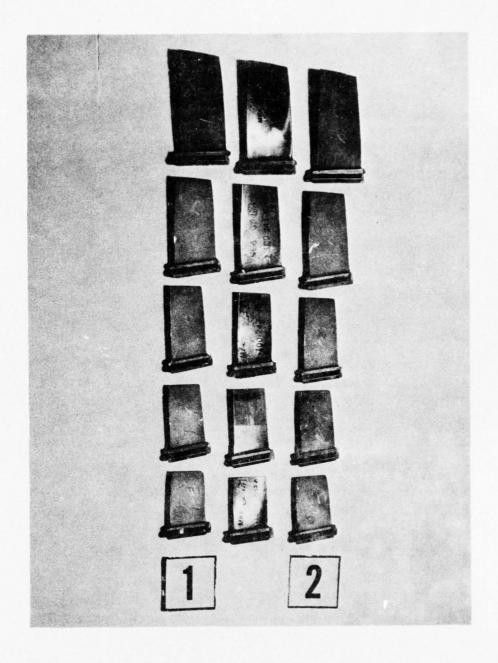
Suction side of compressor rotor blades, first through fifth stage (top to bottom) after 5.6 hours' sand exposure with separator installed. Note new blades in center for comparison.
